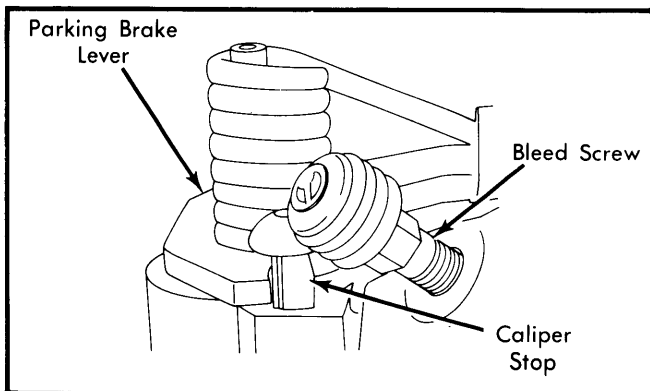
Turbo Rear Disc Brake Caliper Parking Brake Lever Resting Position
